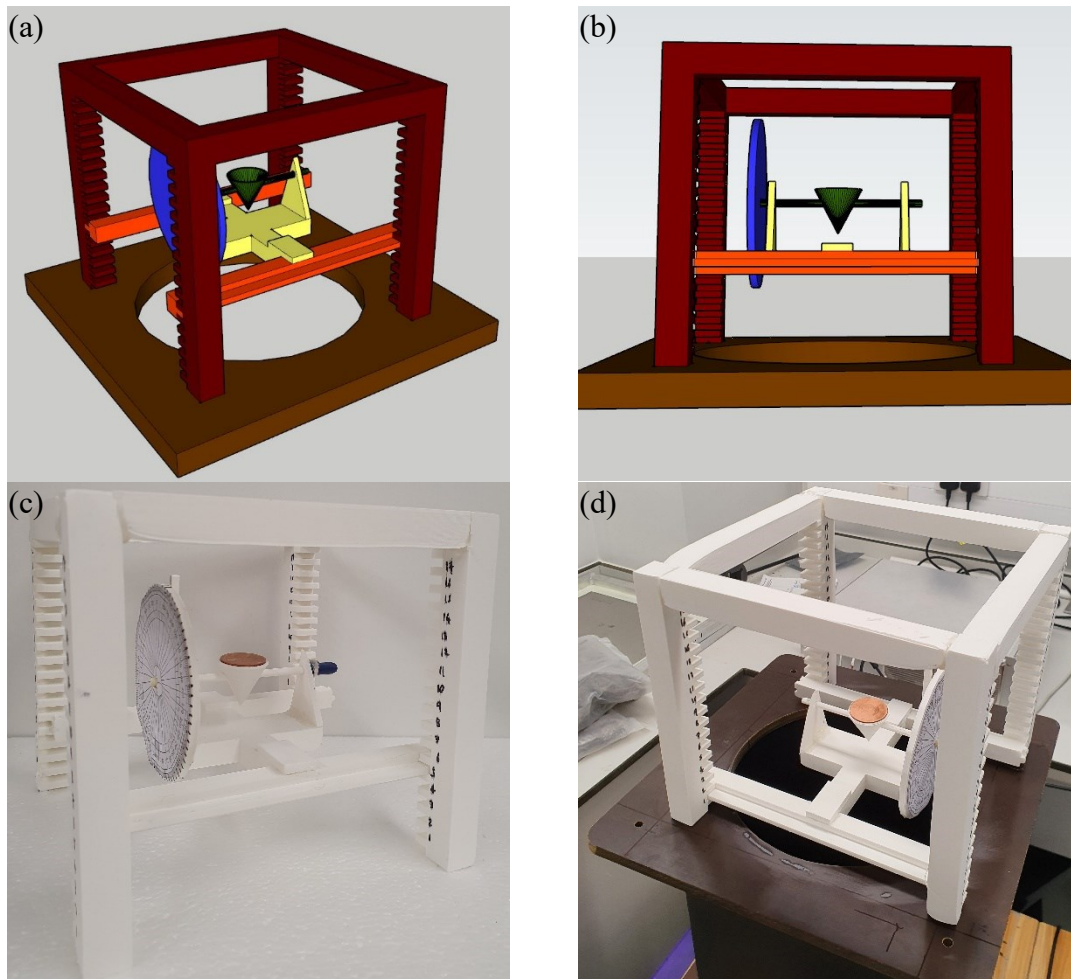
TOM capable of rotating cone shaped objects around one axis outside of the region with uniform magnetic field. (a-b) are the CAD drawings and (c-d) are the manufactured TOM using 3D printing techniques.
